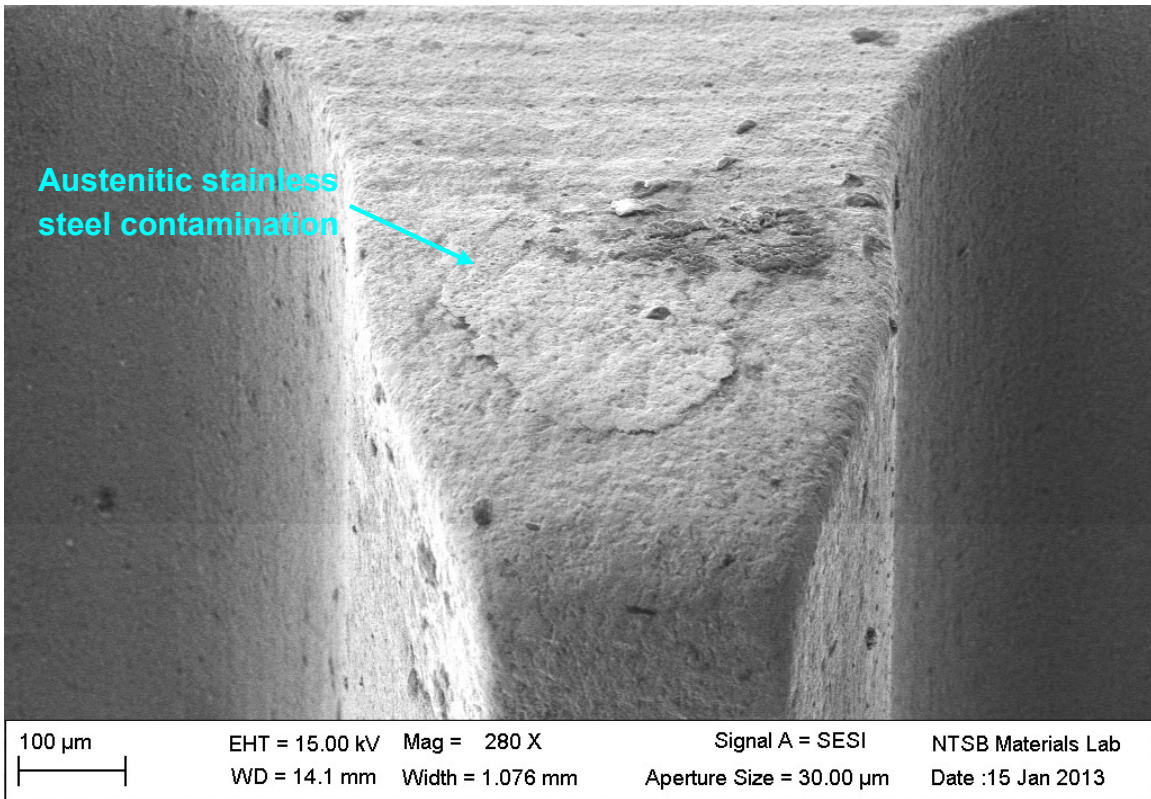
SE micrograph of the dissimilar material on a gear tooth face.
